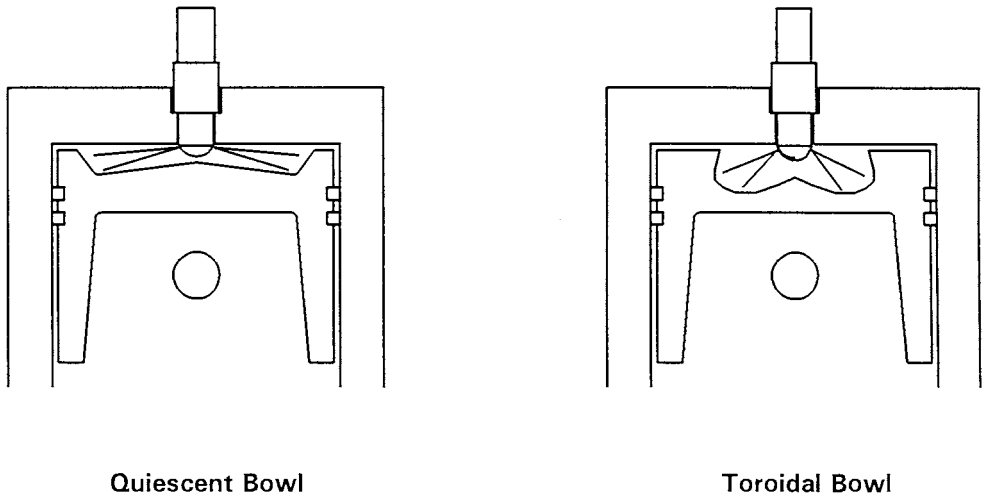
Examples of DI diesel combustion chamber design.
